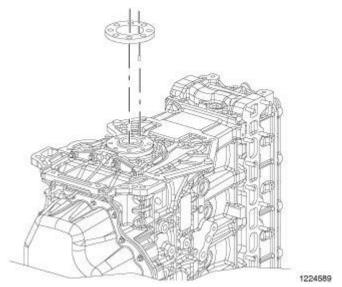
FLYWHEEL & CRANKSHAFT Courtesy of CHRYSLER LLC
